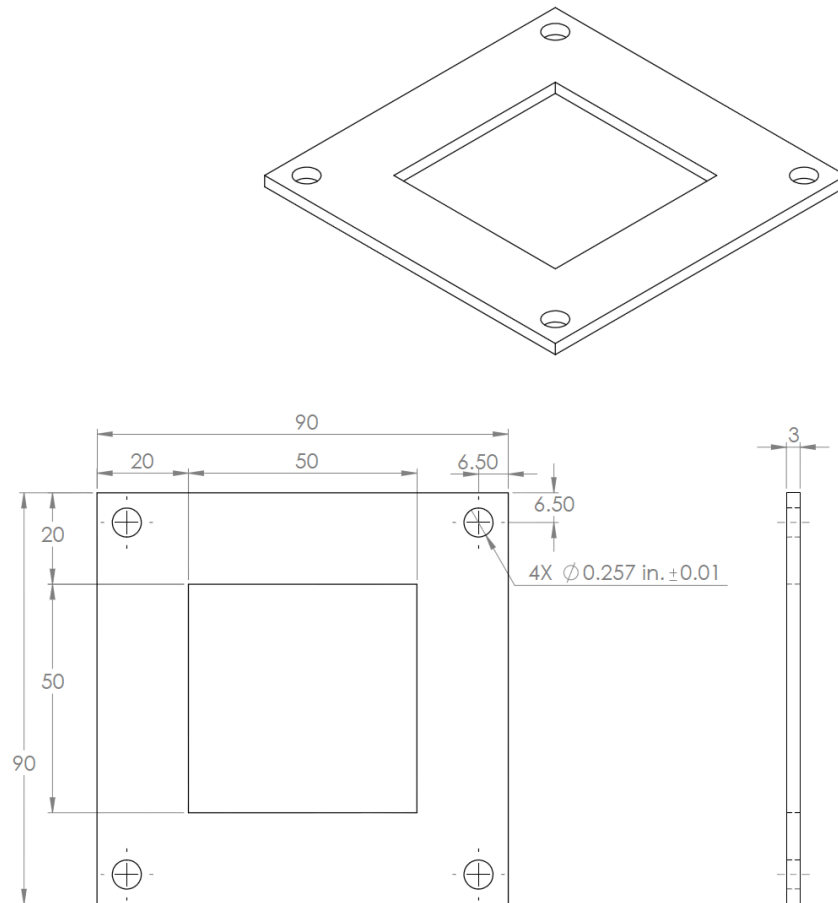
The flat plate for our prototype design. All dimensions are in mm with a tolerance of 0.1 mm unless other specified.
